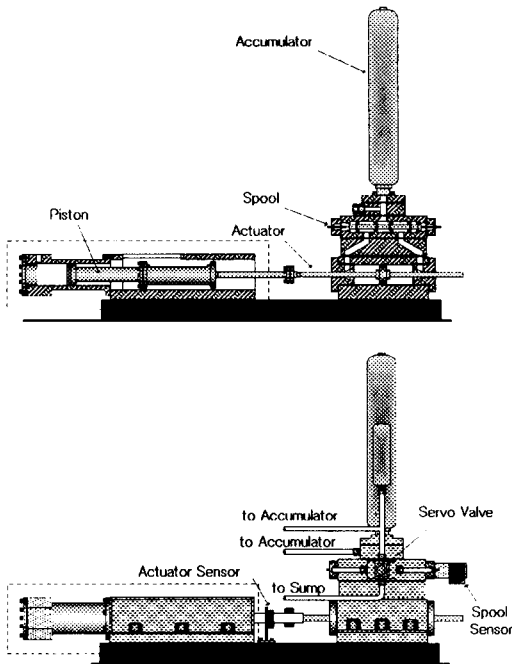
Sectional view and outlook of a new RCEM (the parts enclosed by dotted line are cylinder & piston to be manufactured later)
